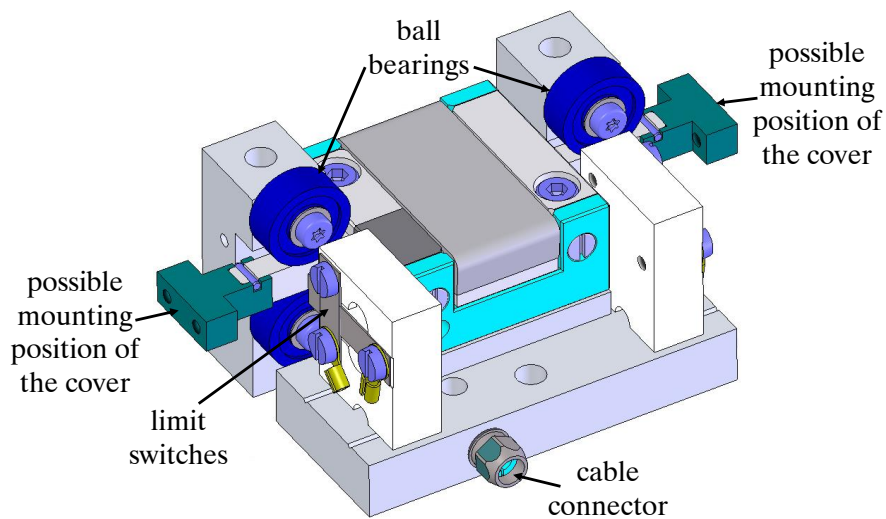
CAD drawing of the N-310K176 tested during the Piezotest. The motor axis is stabilized by ball bearings (marked in dark blue). The axis is the only part of the motor which is moved once the motor body is screwed down to another surface. The cover can be attached to the T-shaped parts of the axis (marked in green). Inside of the central box (marked in light blue) the piezo walk drive mechanism is installed. At the left side of the motor the contact plates of the limit switches can be seen.
